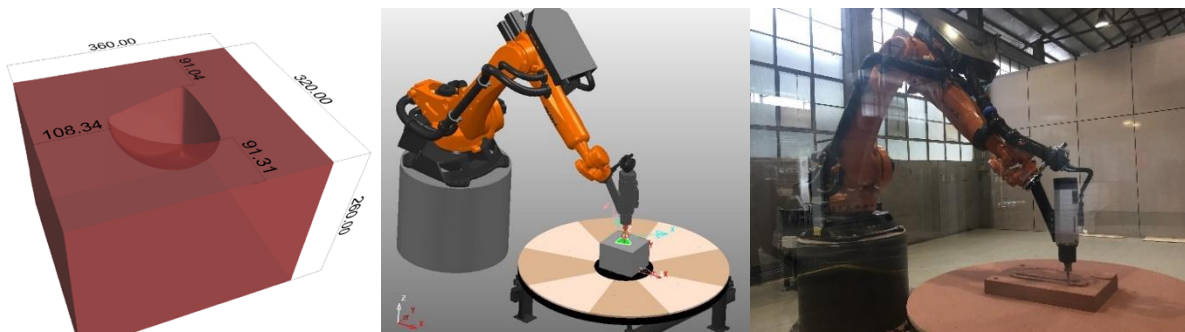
Model of sand mould, toolpath and robotic milling of sand mould. Photo Credits: UAP Company.
